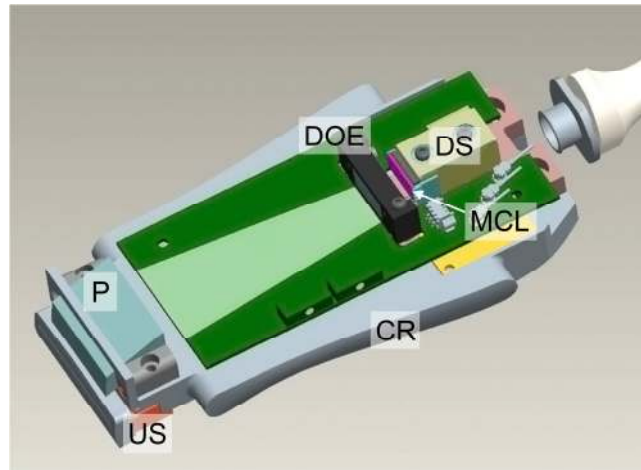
A schematic of the handheld probe. US: ultrasound array transducer, P: deflecting prism, DOE: diffractive optical elements, DS: diode stack, MCL: micro-cylindrical lenses, CR: Aluminum cooling rim.
